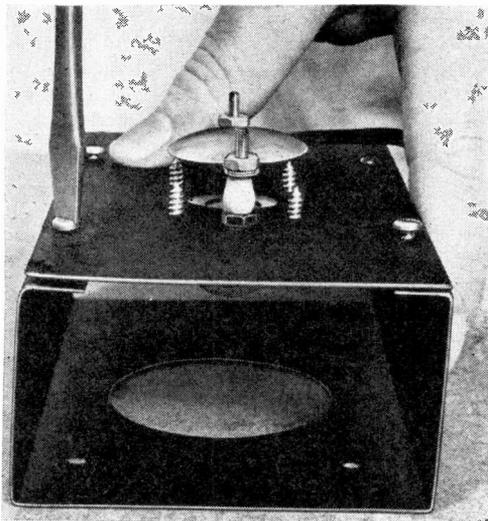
Space lamp reflector exactly $\frac{1}{2}"$ away from rear panel, using spacers and #6 machine hardware.
